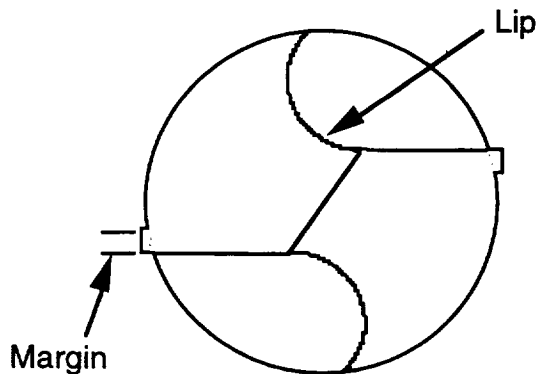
Drill Tip Showing Drill Wear Measurement Locations
